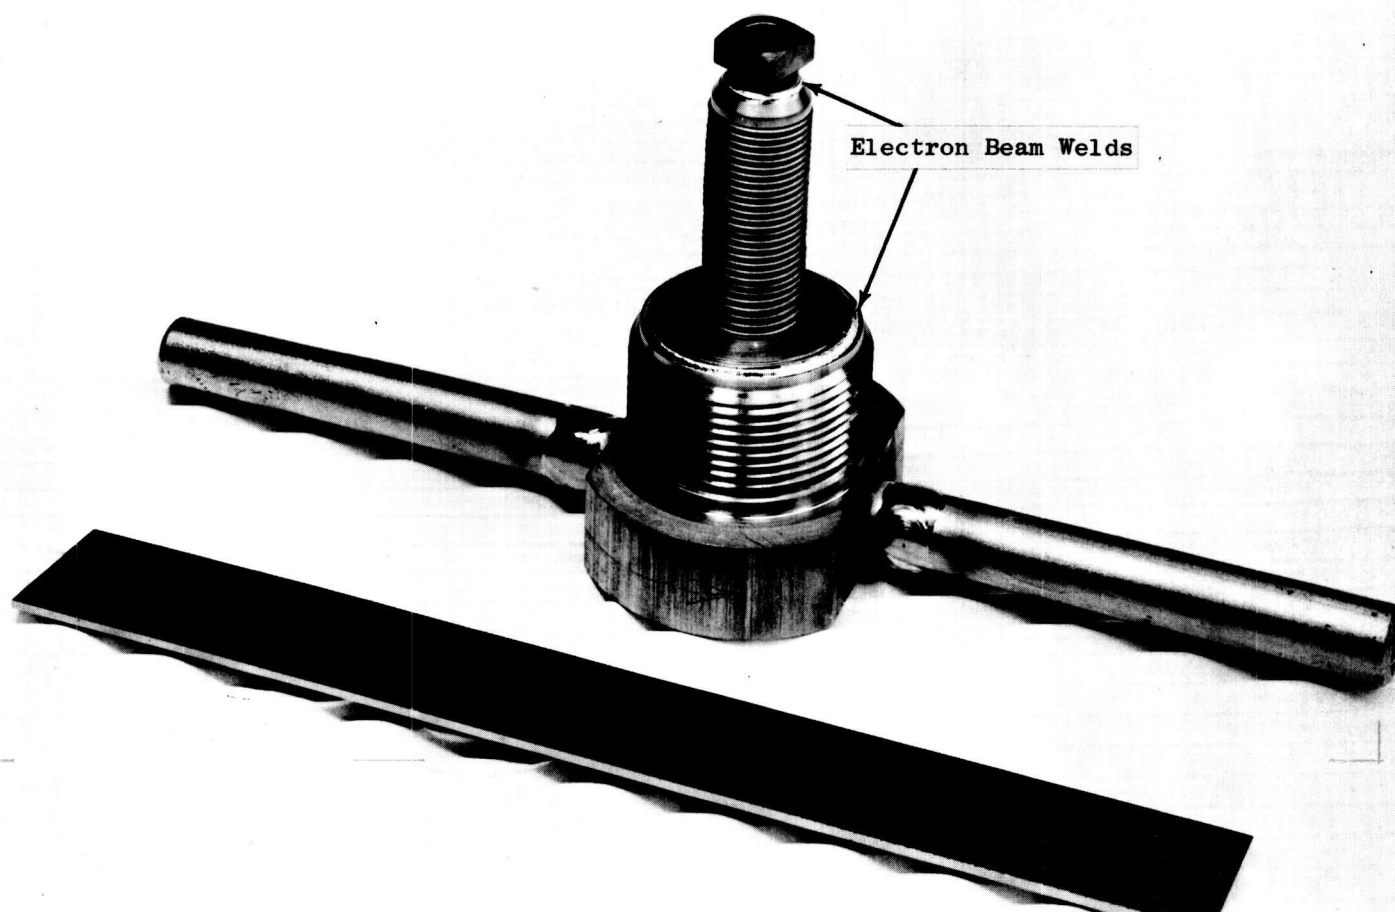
Cb-1Zr Hoke Bellows Valve After Completion of Welding Operations.
